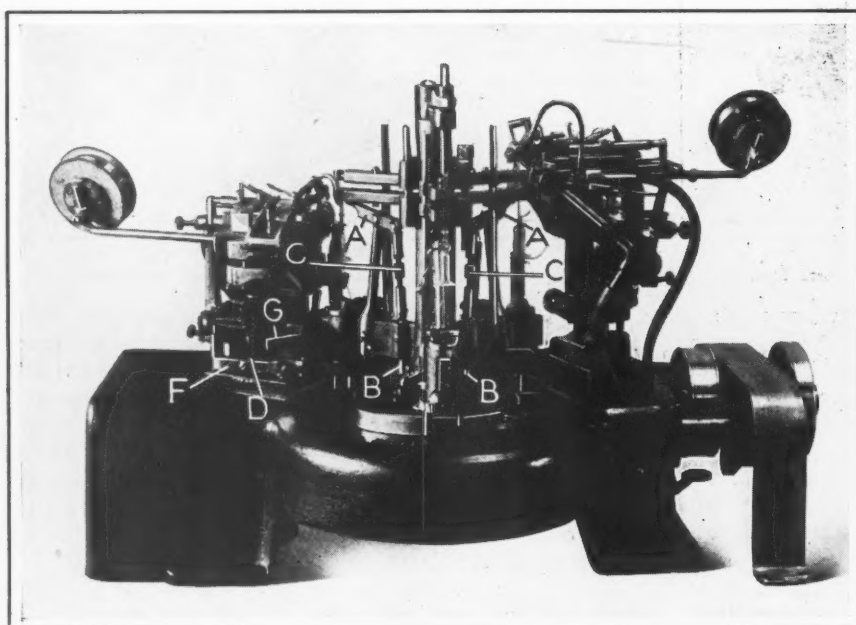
Inserting Machine with Two Heads for inserting Wires in the Stems for Top and Bottom Anchors
